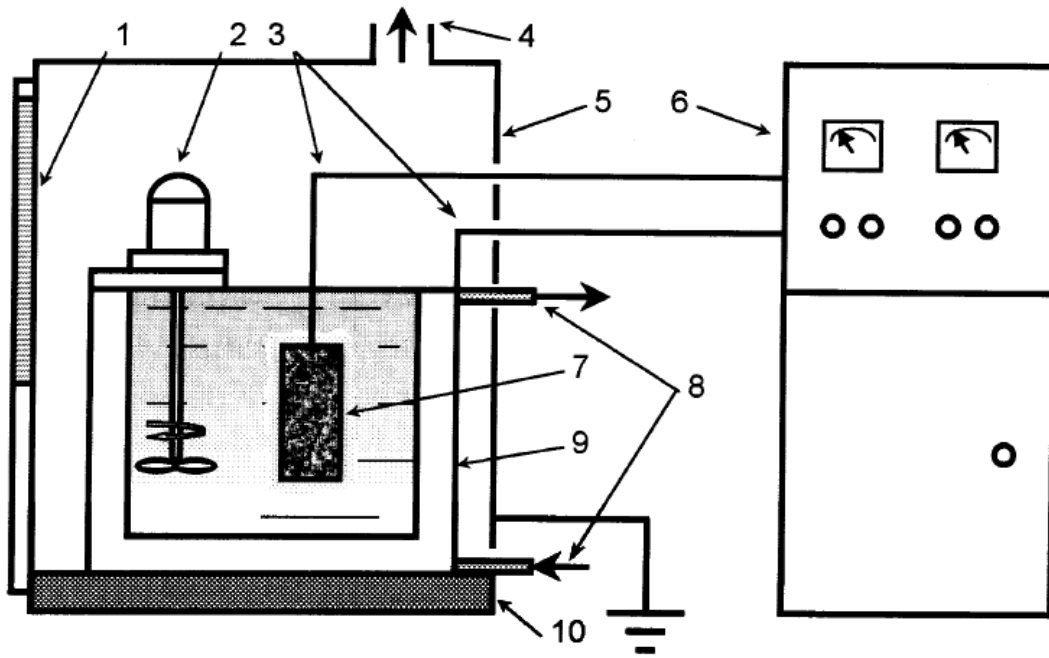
Typical arrangement of the equipment used for PED treatment: (1) window, (2) mixer, (3) connecting wires, (4) exhaust/ventilation system, (5) grounded case, (6) power supply unit, (7) work piece, (8) cooling system, (9) bath, (10) insulating plate [10].
